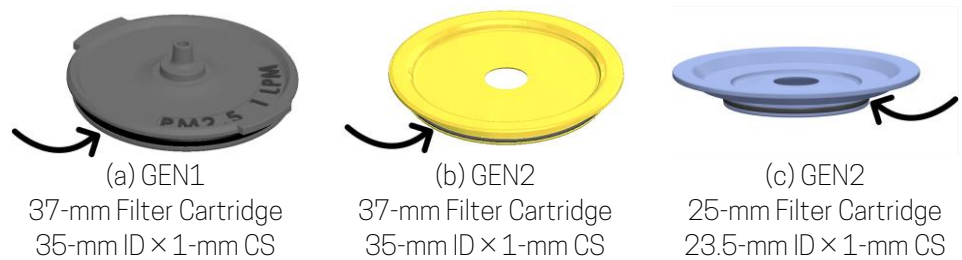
Locations and sizes of the Buna-N (70A durometer) filter cartridge O-rings.
